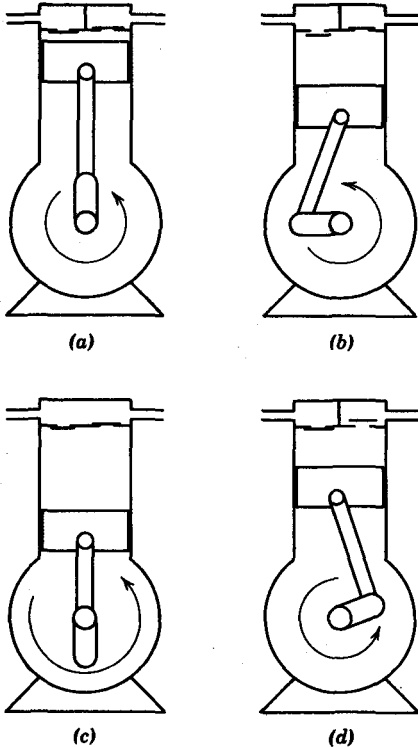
(a) Piston at top dead center. (b) Suction valves open. (c) Piston at bottom dead center. (d) Discharge valves open.
